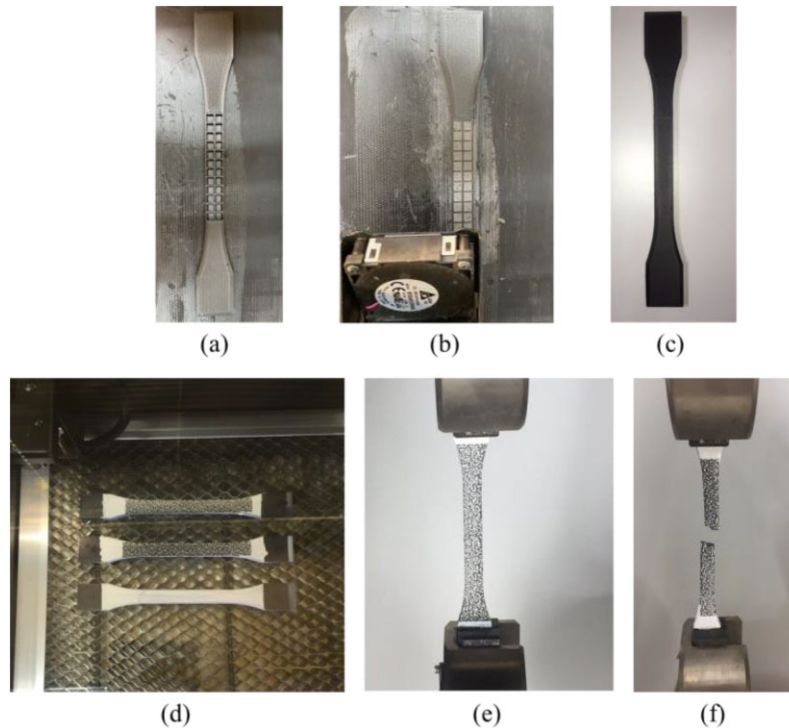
Procedure of making sandwich beams filled with metal mixture (a) Bottom beam and square grid core (b) Filling metal mixture (c) Sandwich beam (d) Making speckle pattern using laser cutting machine (e) Tensile test (f) Broken specimen.
